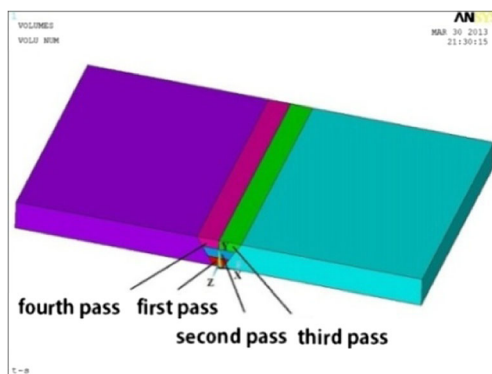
Geometric weld model showing experimental and simulated weld pass sequence
